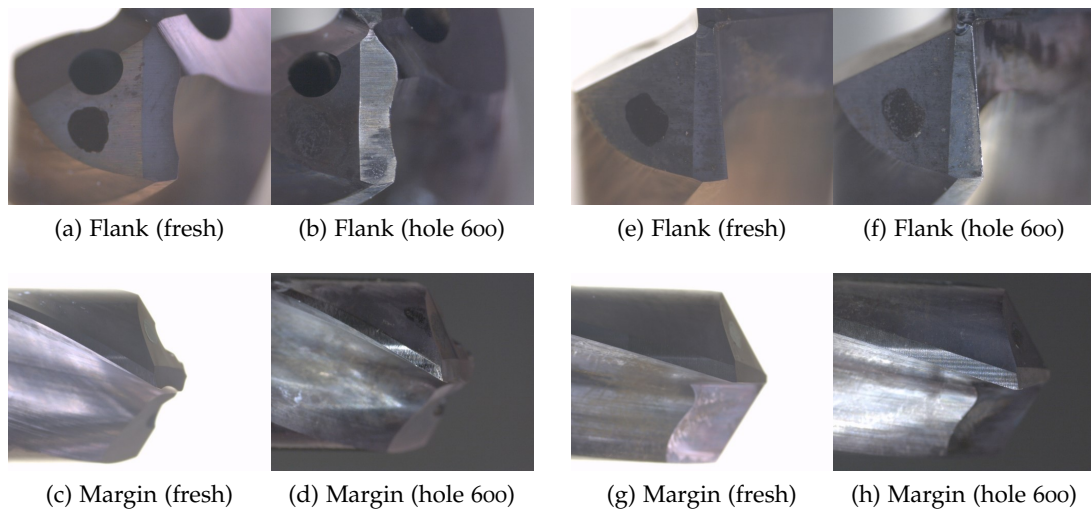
Tool condition before and after tests for each tool geometry a-b-c-d) R204.6D tool geometry, e-f-g-h) BH04.5D tool geometry
